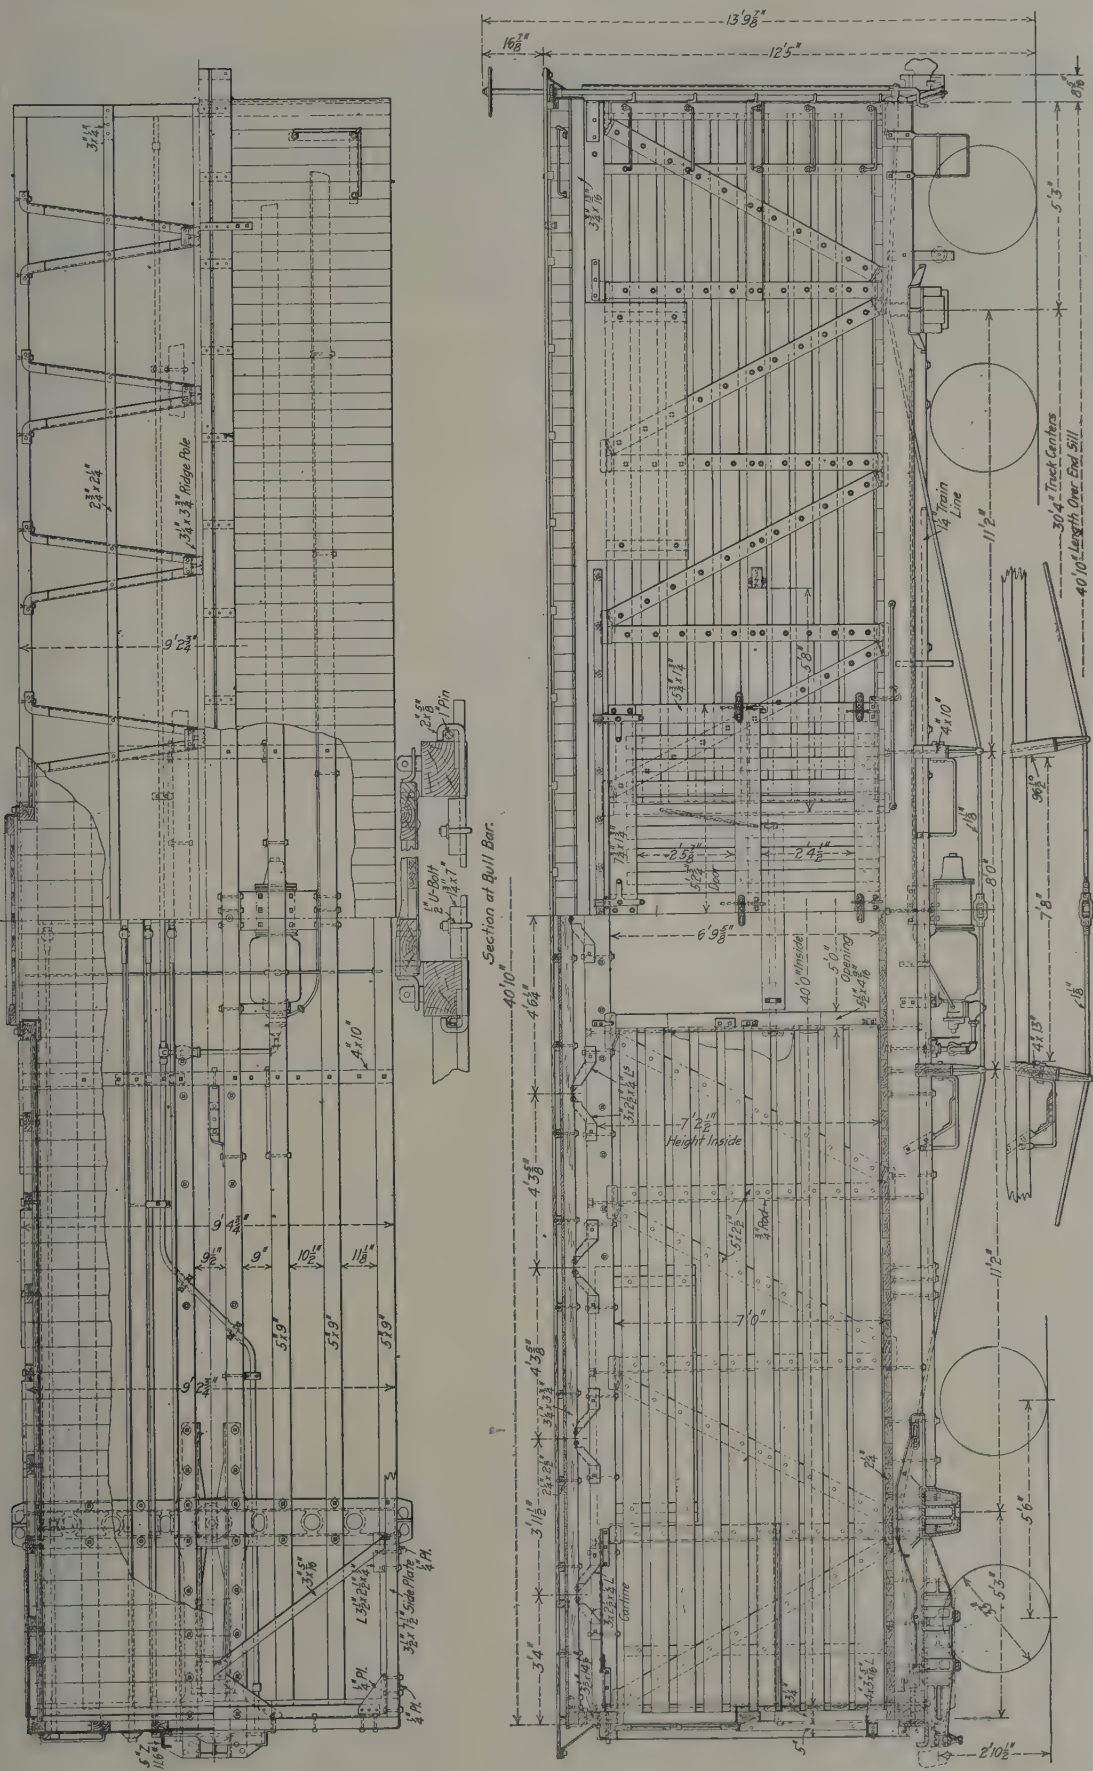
Plan and Elevation of 40-Ton Wooden Stock Car Shown in Figs. 189-191.
